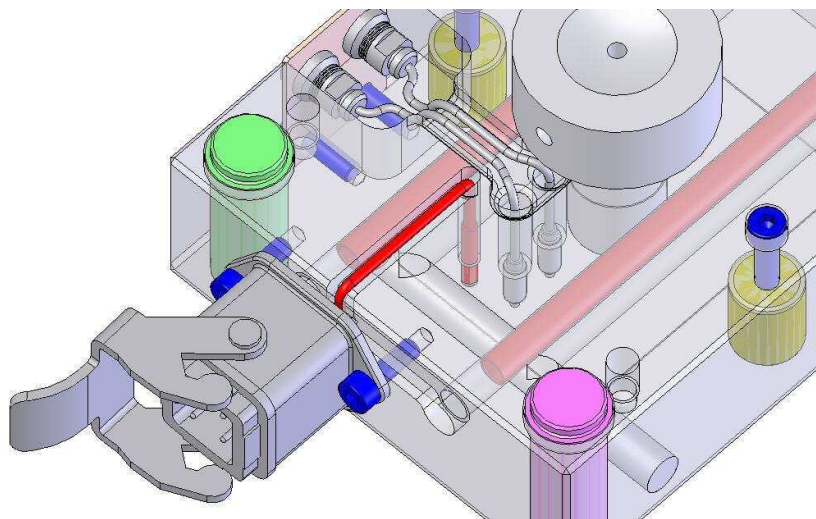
Overview of the thermocouple assembly on mould plate (2)
